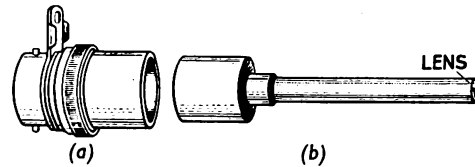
Lens assembly for cinebronchography : (a) camera-socket attachment; (b) lens tube with adaptor for camera-socket at proximal end and lens cell at distal end.
